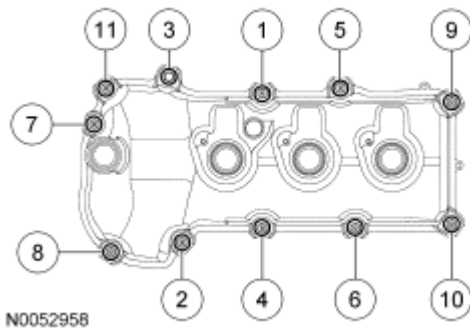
Installing RH Valve Cover Stud Bolts In Sequence
